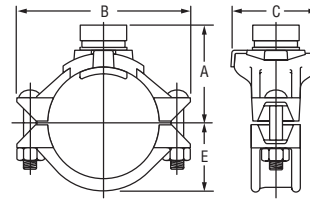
BRANCH OUTLET WITH GROOVED BRANCH (TEE CONFIGURATION)
